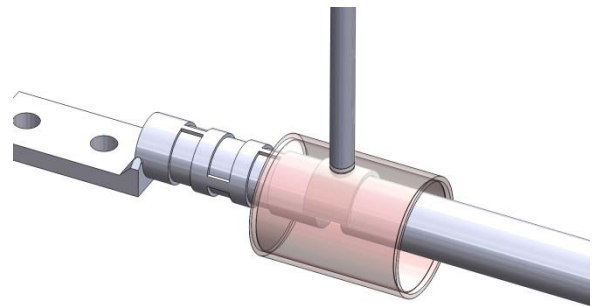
Use the Teflon tool to hold the heat shrink and saddle in position.
